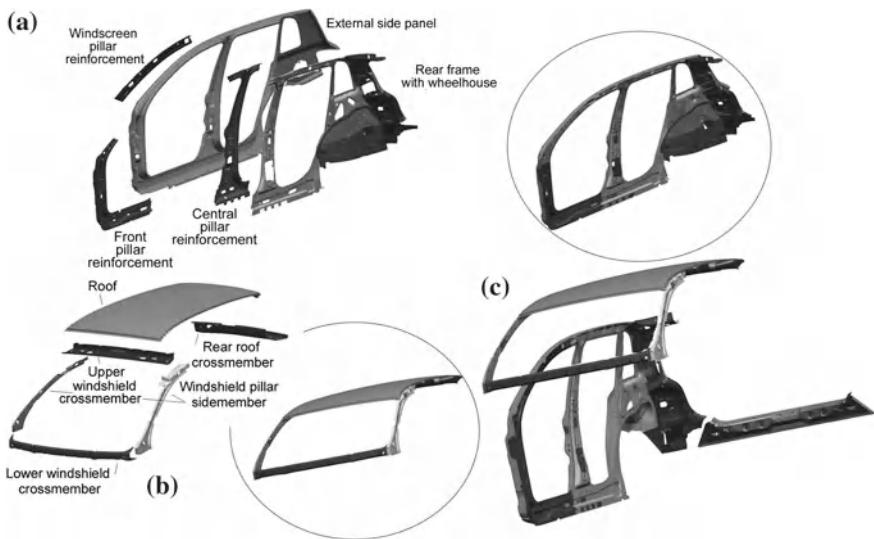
Aesthetic parts of the body: a Side ring; b windscreens ring and roof; c aesthetic parts assembled (only the *right side* is shown) (courtesy of Fiat)
